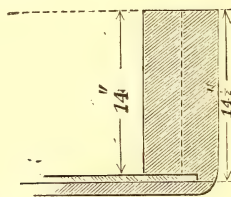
LONGITUDINAL SECTION THROUGH STEM.
